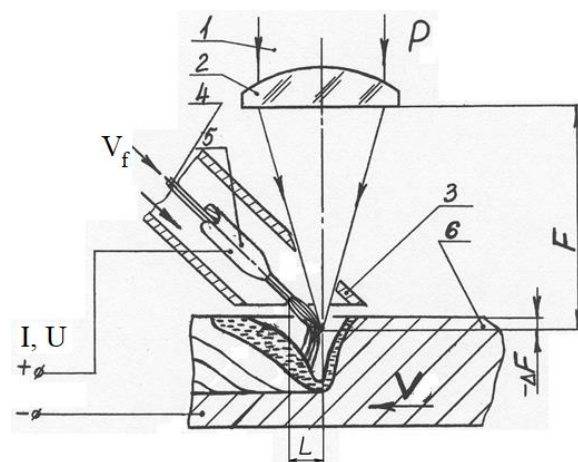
Scheme of experiments on hybrid laser-MIG welding of aluminum alloys:
